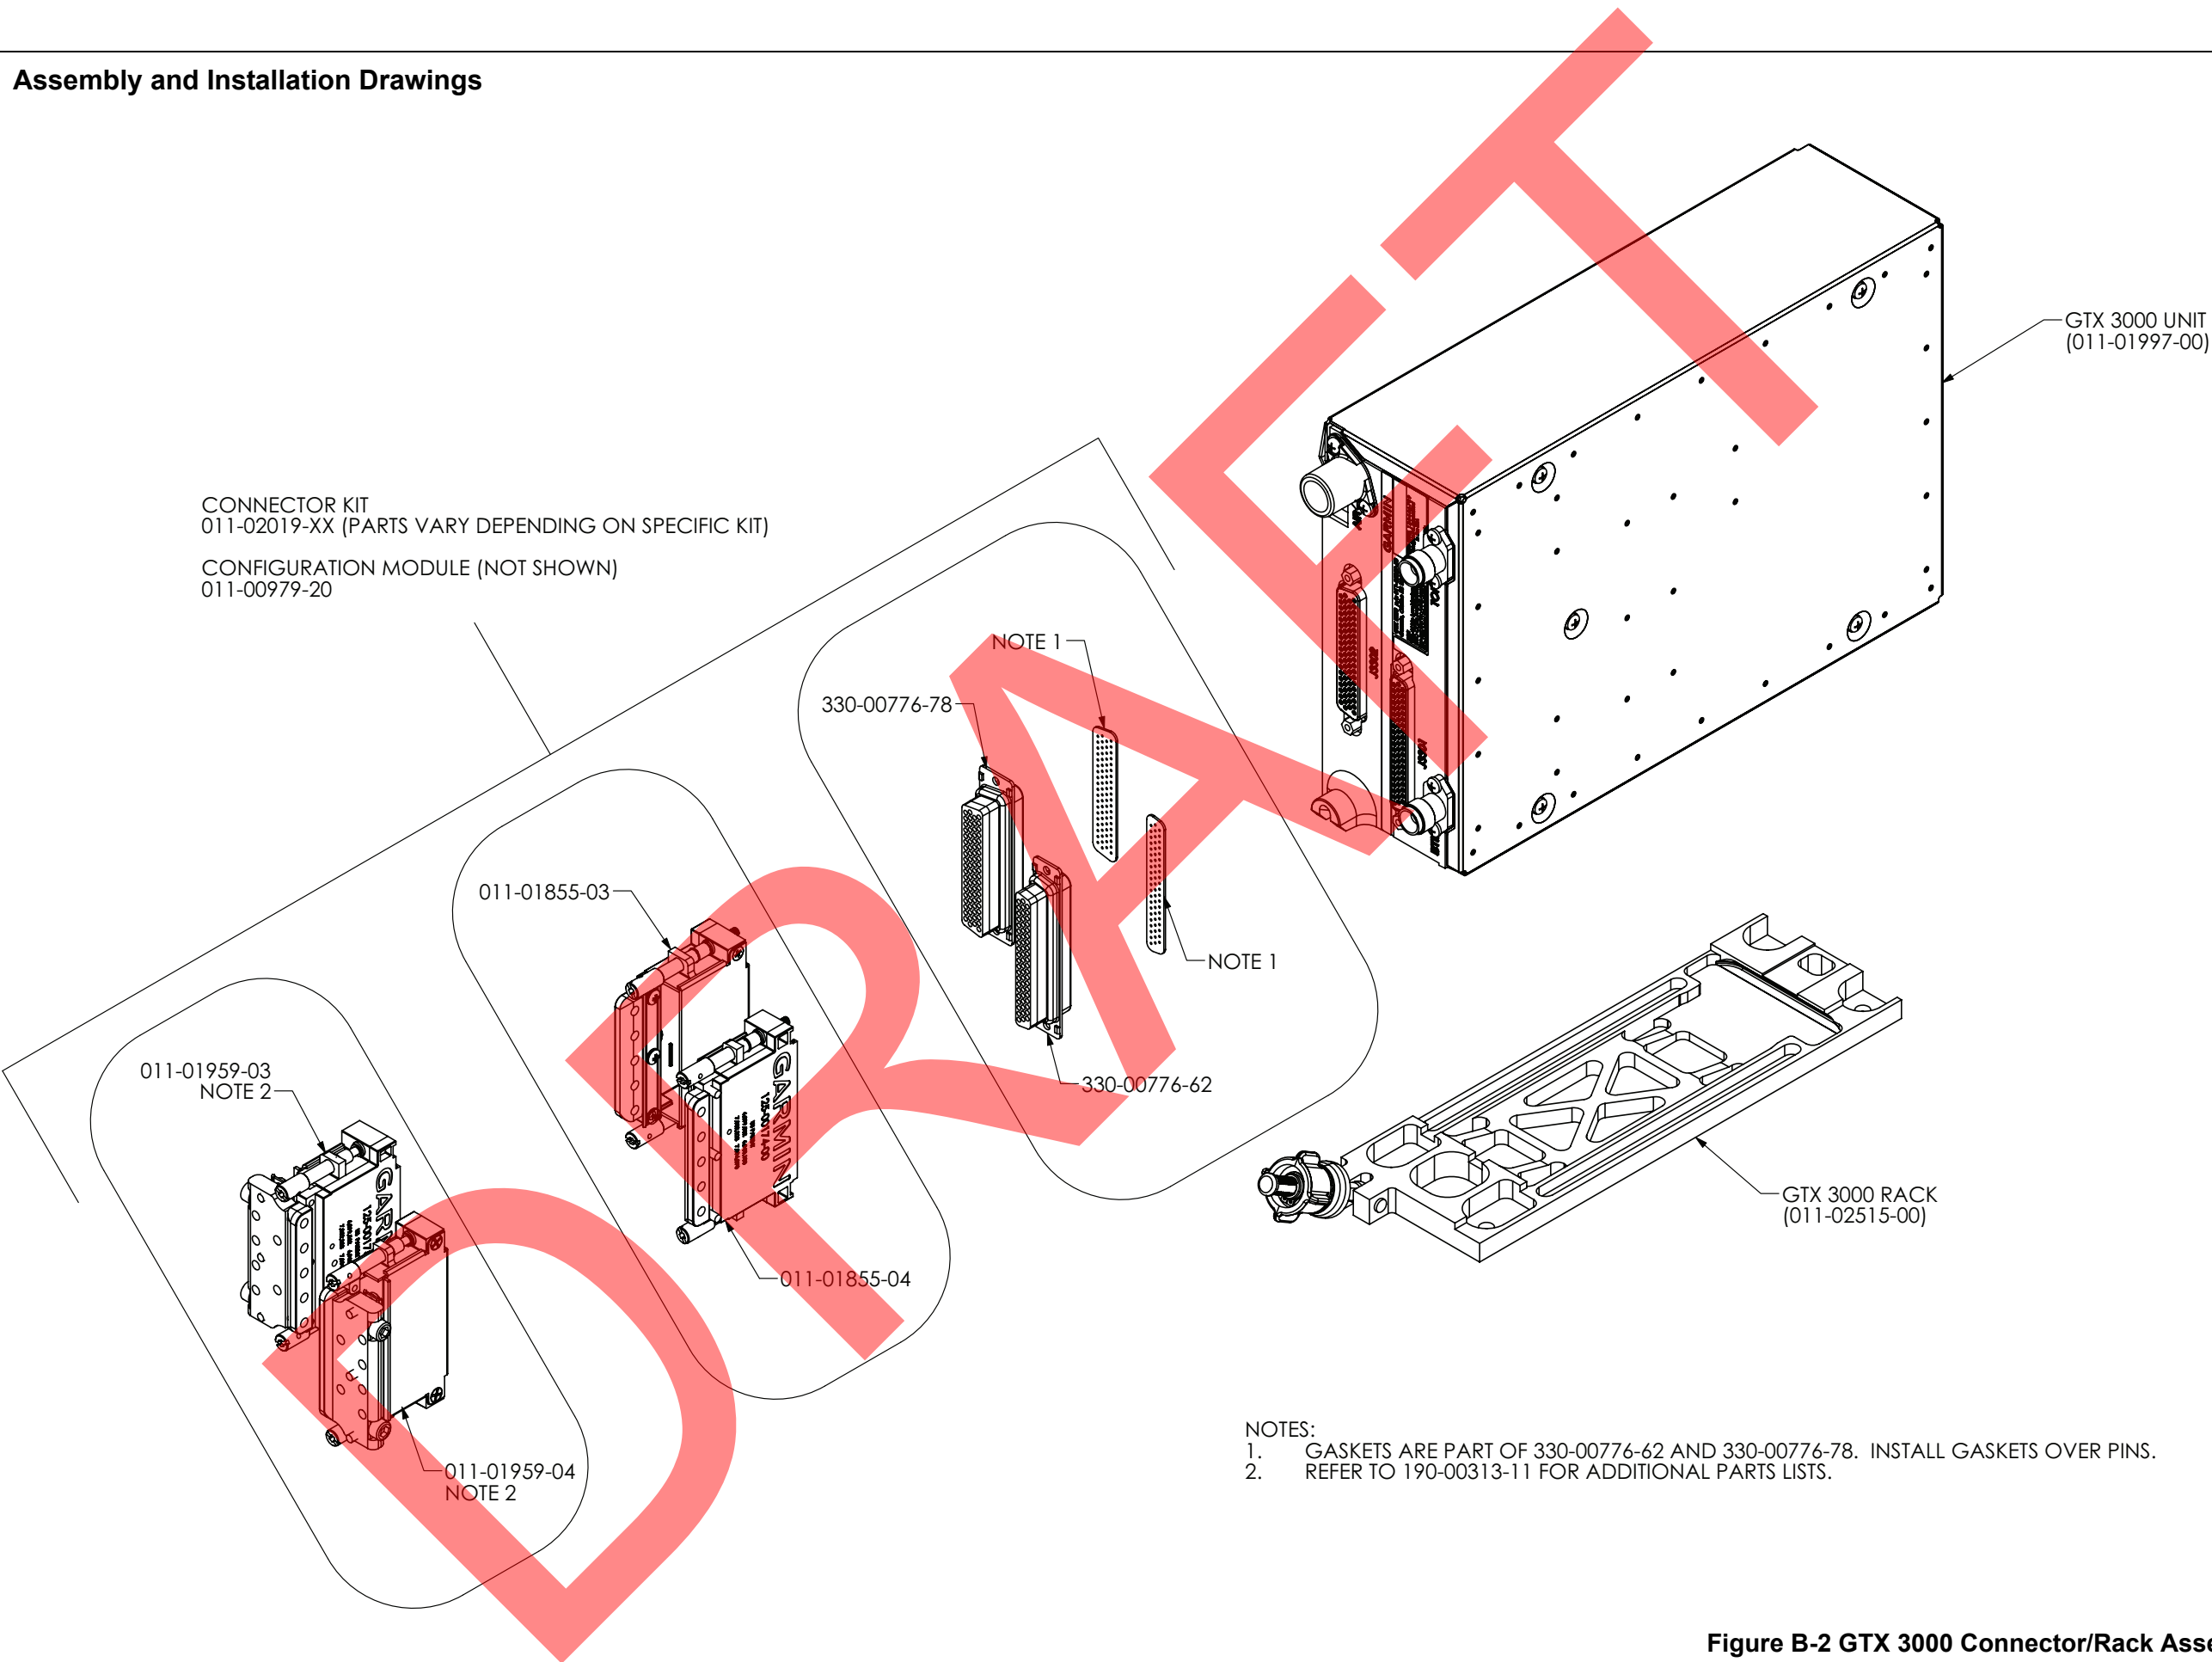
GTX 3000 Connector/Rack Assembly Drawing
